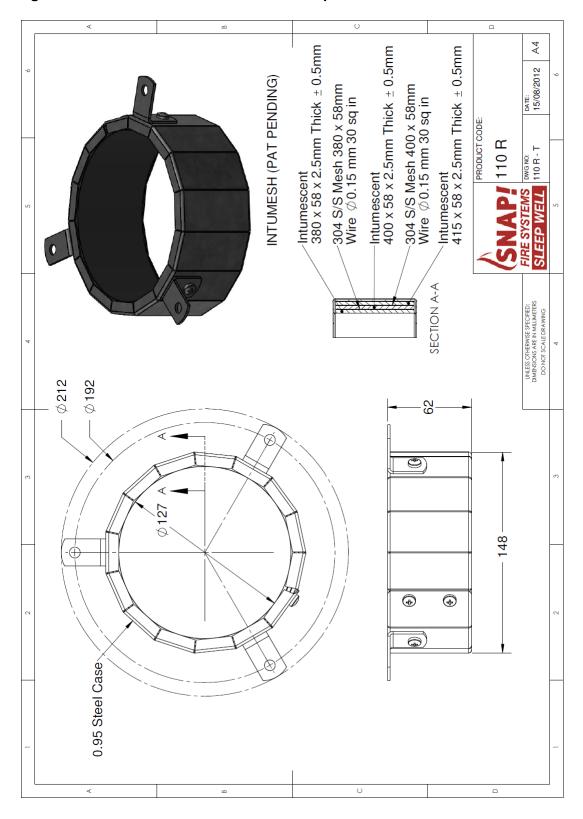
110 R Retro-fit Collar installed to specimen No. 1
